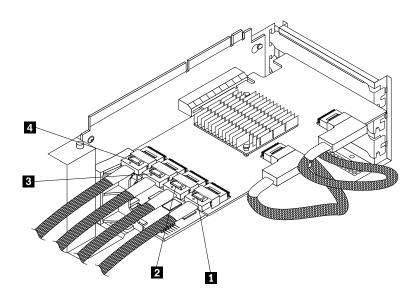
Connecting cables from the expander card to the 2.5-inch hot-swap hard-disk-drive backplanes
